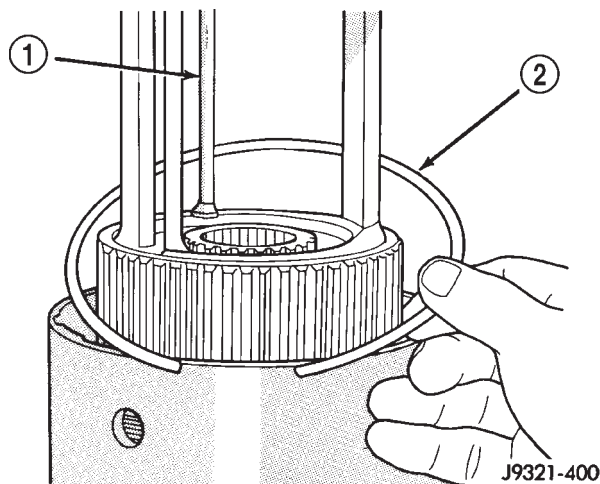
Direct Clutch Pack Snap-Ring Installation
